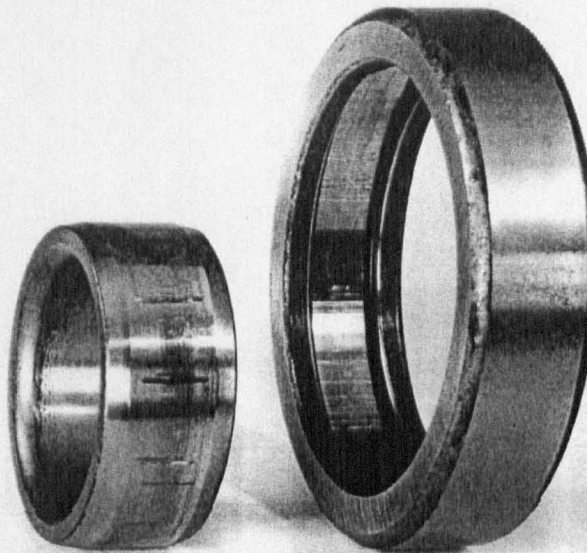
Inner and outer ring of a cylindrical roller bearing exposed to vibration (SKF, 1994)
